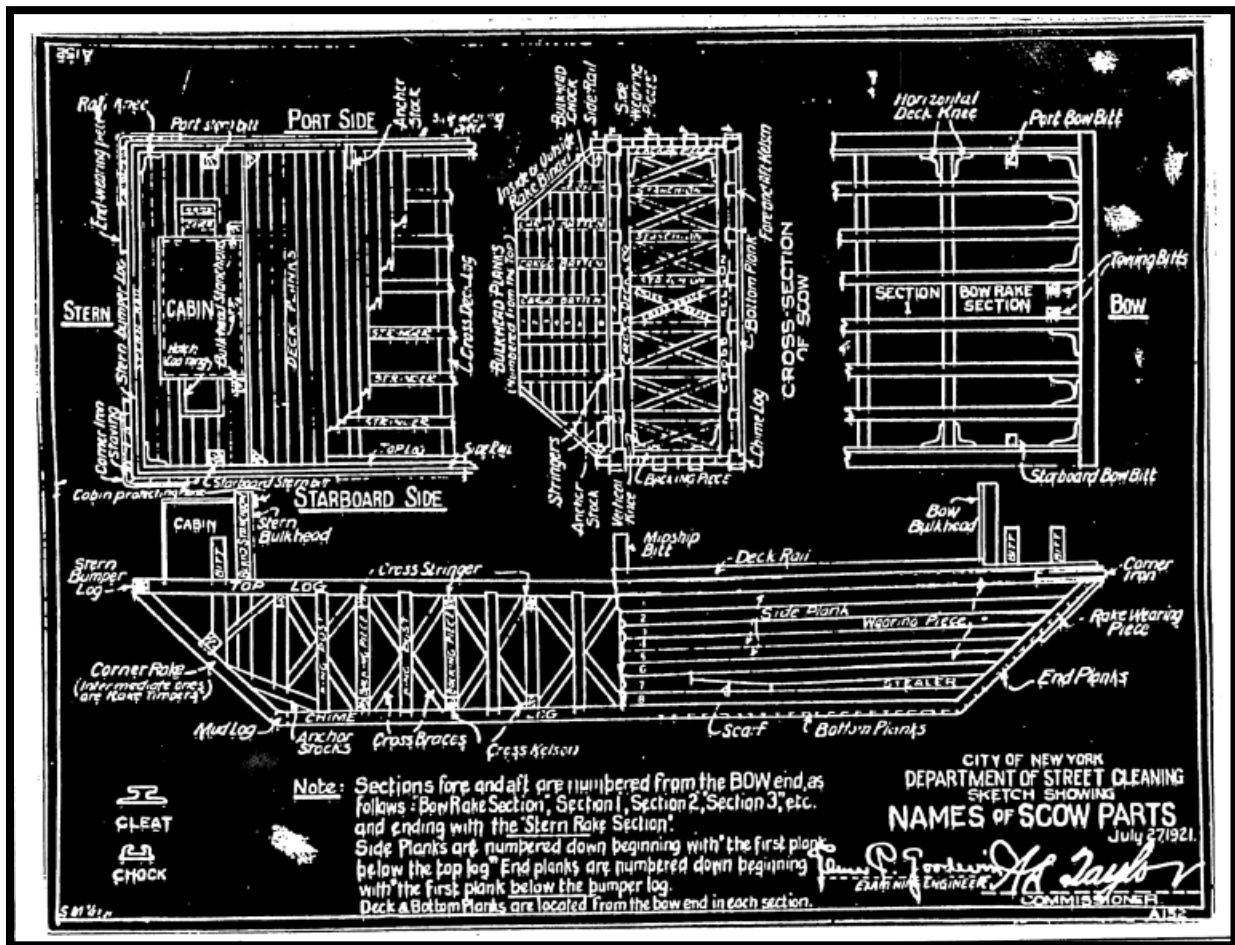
Plan of a 1921 street cleaning scow (Image by New York City Department of Street Cleaning 1921).
